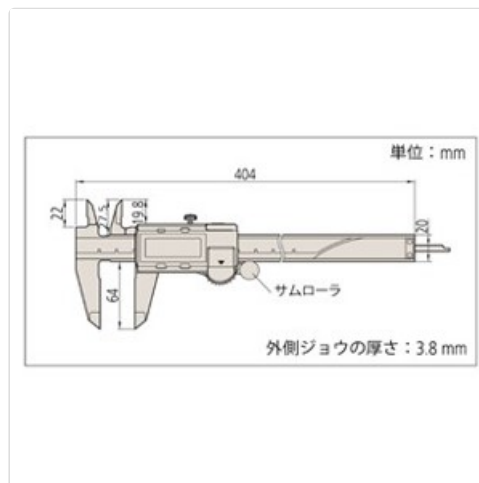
Dimensional diagram of the caliper, illustrating key measurement points and overall dimensions. Note the 20mm main scale width for improved parallelism.
